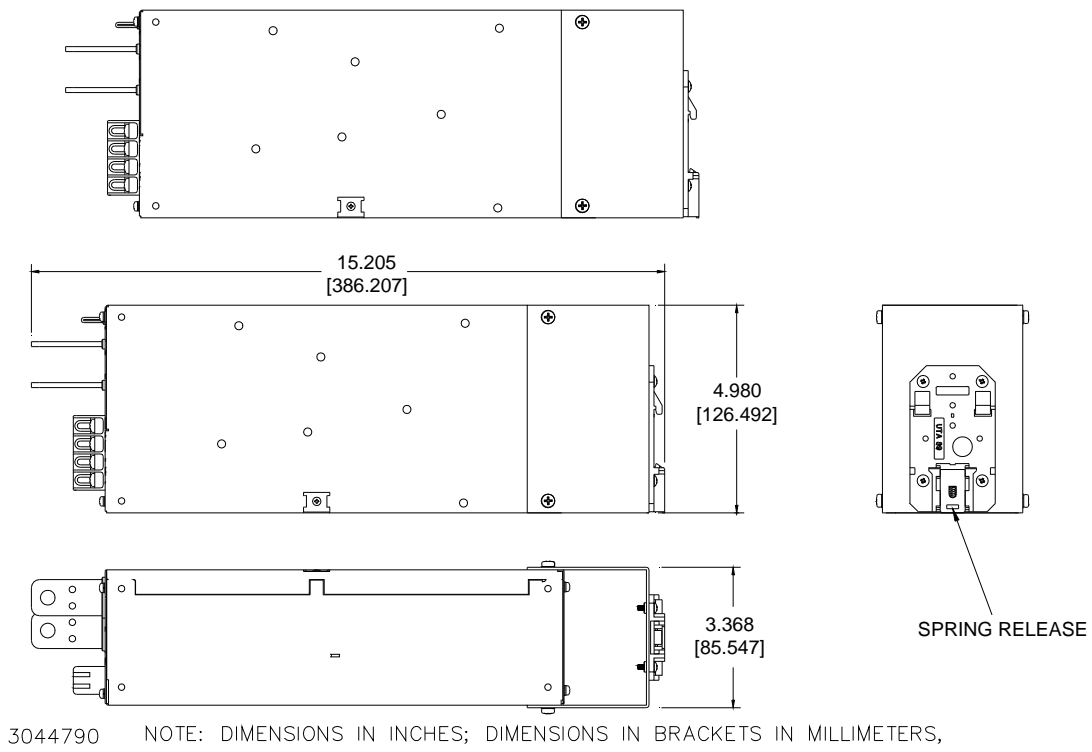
HWS1500 POWER SUPPLY WITH KIT INSTALLED, OUTLINE DIMENSIONS
